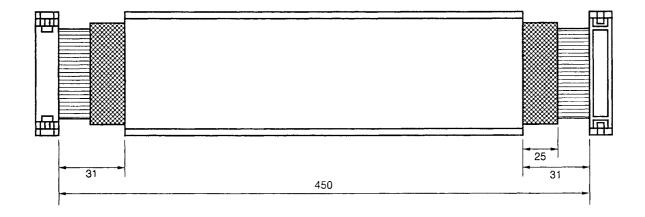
Drawing of EP-17K28GT (cable) (unit: mm)
